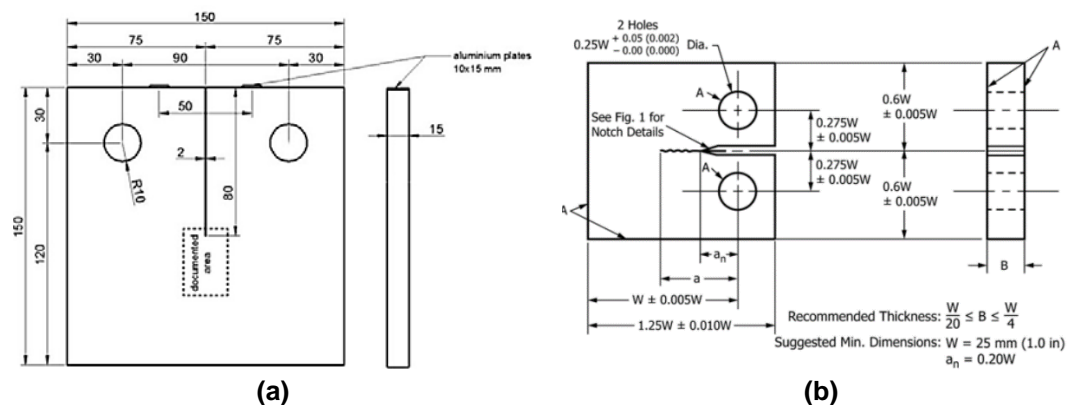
Geometry of the Compact Tension (CT) specimen [31, 32].
